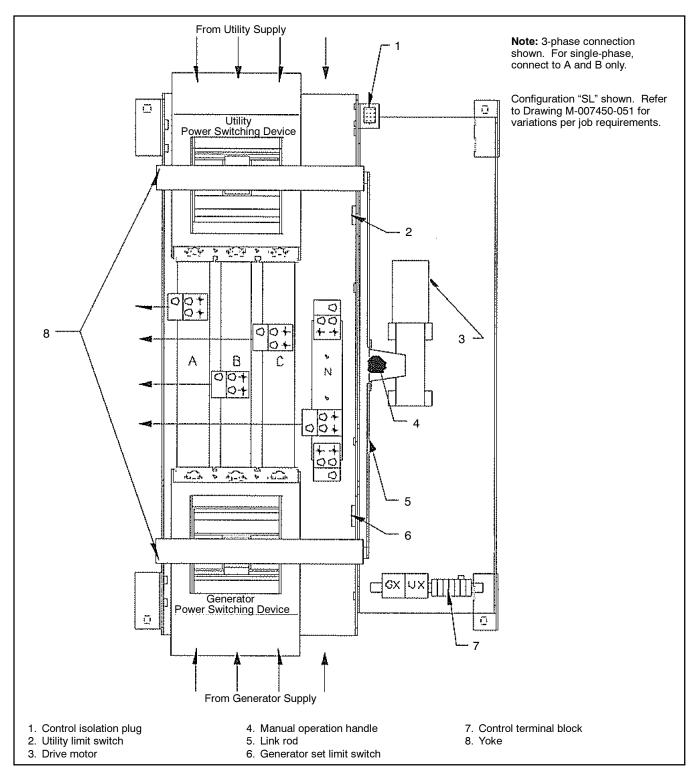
Front View, Typical, 3-Pole Style, 400A-1200A Transfer Mechanism
